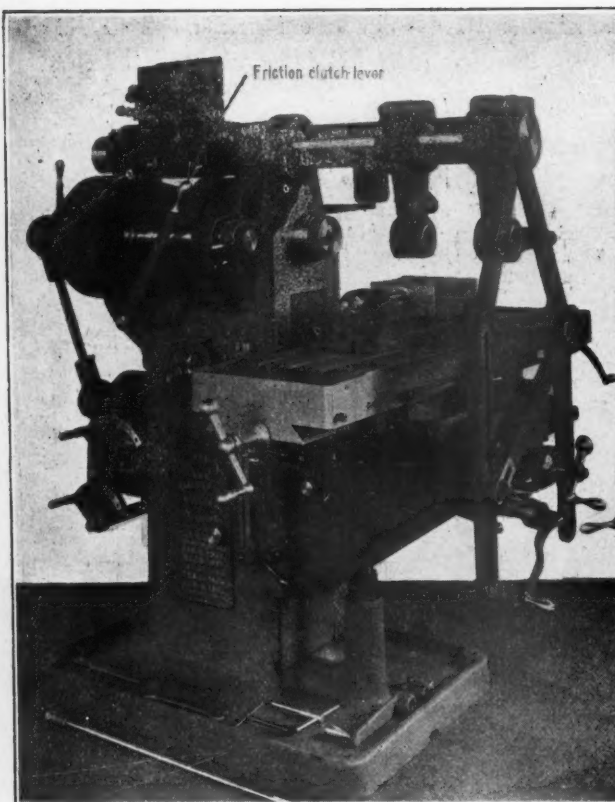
FRONT VIEW OF TOOL, SHOWING CONVENIENT ARRANGEMENT FOR OPERATING HANDLES.
